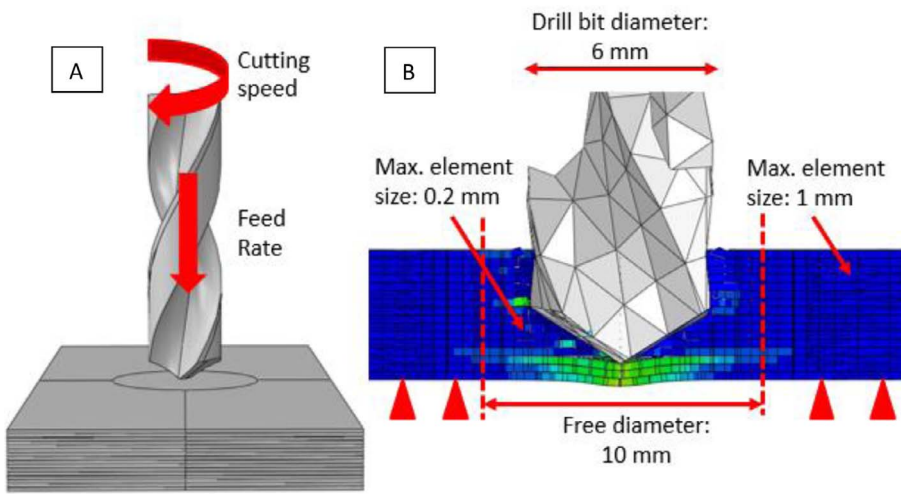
Movements imposed in the drill (A). Vertical section of the tool penetrating the workpiece showed details of boundary conditions and element size (B).
